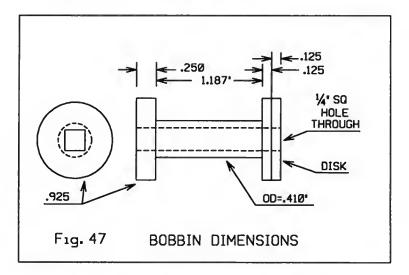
shows the bobbin dimensions. The barrel diameter should be a minimum of .410" and the length should be from 1.187 to 1.200". To machine the coil form, Chuck a 1 3/4" long piece of 1" OD Delrin or linen phenolic rod and skim the surface so it will run true. Face the end. Reverse it and do the same. Center drill and drill 1/4" through.
